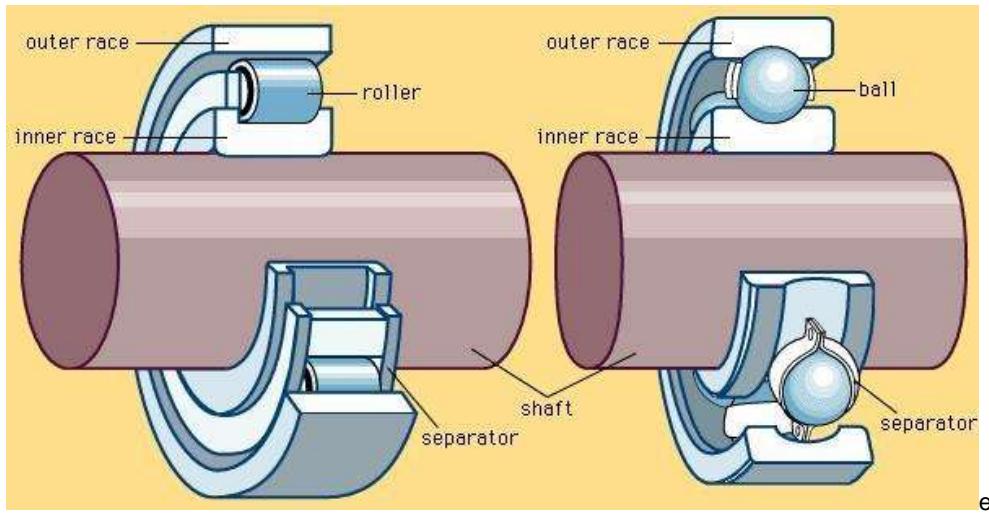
SHOWING THE 4 BASIC PARTS OF A BEARING.
